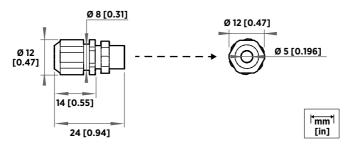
HPP271MOUNTINGSET1/HPP272MOUNTINGSET1 dimensions
